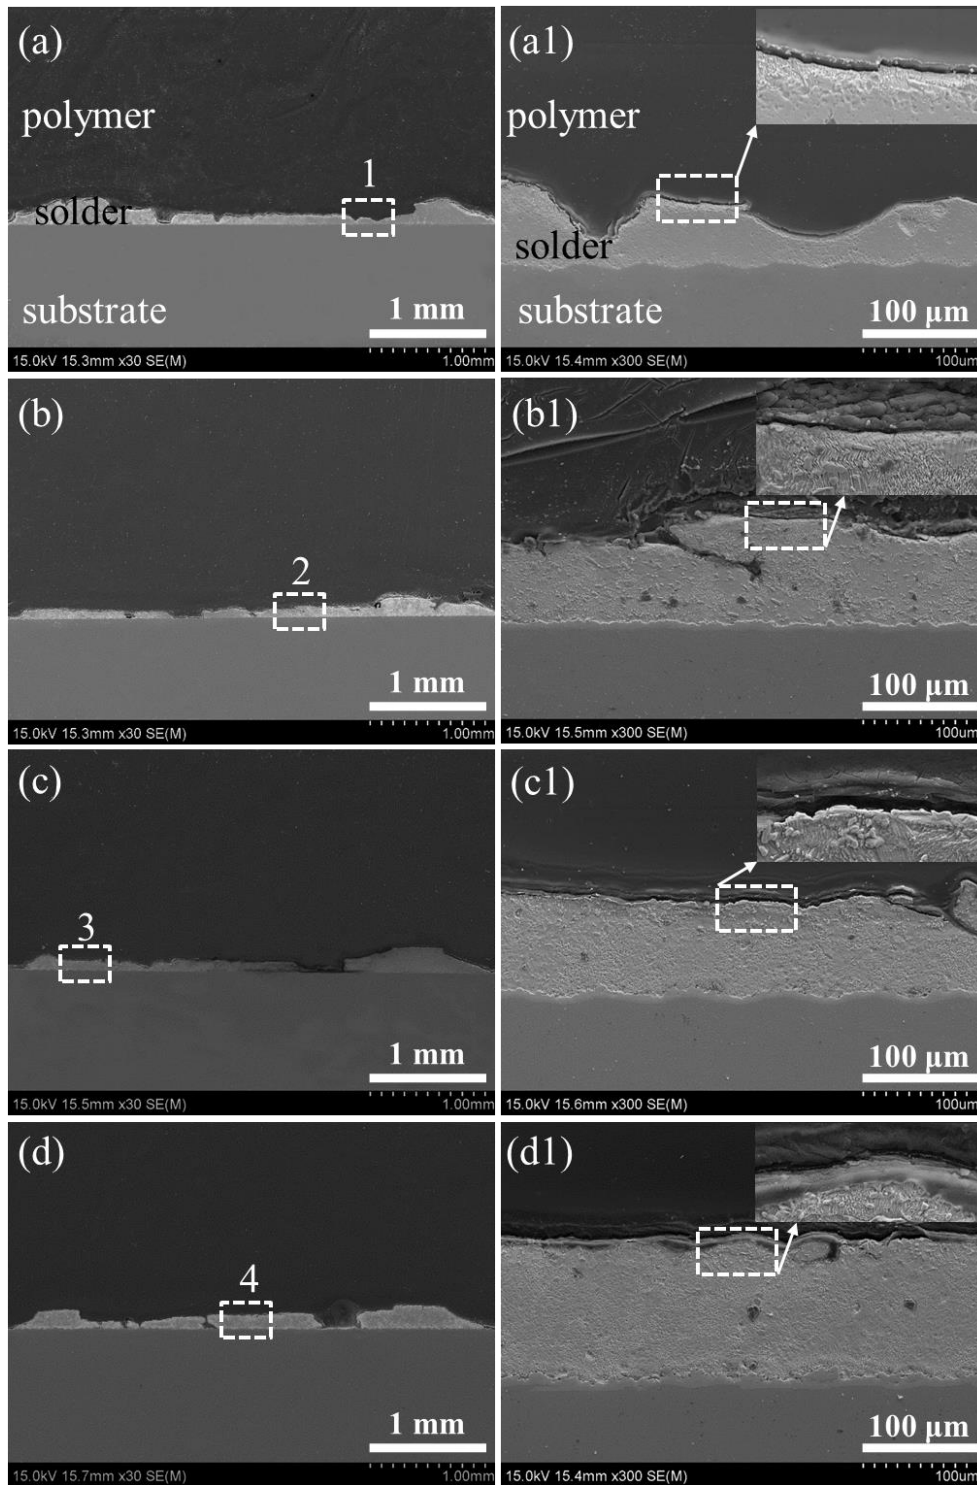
Cross section of fracture of plain Sn1.0Ag0.5Cu solder joint with different thermal aging times. (a)-(d) overall images of the cross section of fractures. (a1)-(d1) high magnified view of area 1, 2, 3, and 4 of Fig. 6-18(a)-(d), respectively. (a), (a1) 0 h; (b), (b1) 168 h; (c), (c1) 504 h; (d), (d1) 1008 h.
